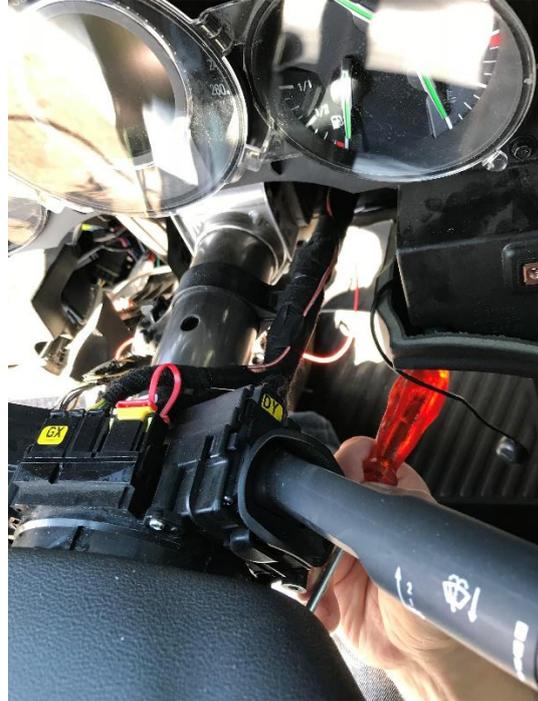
Depiction of how to disassemble the airbag, step 2.
